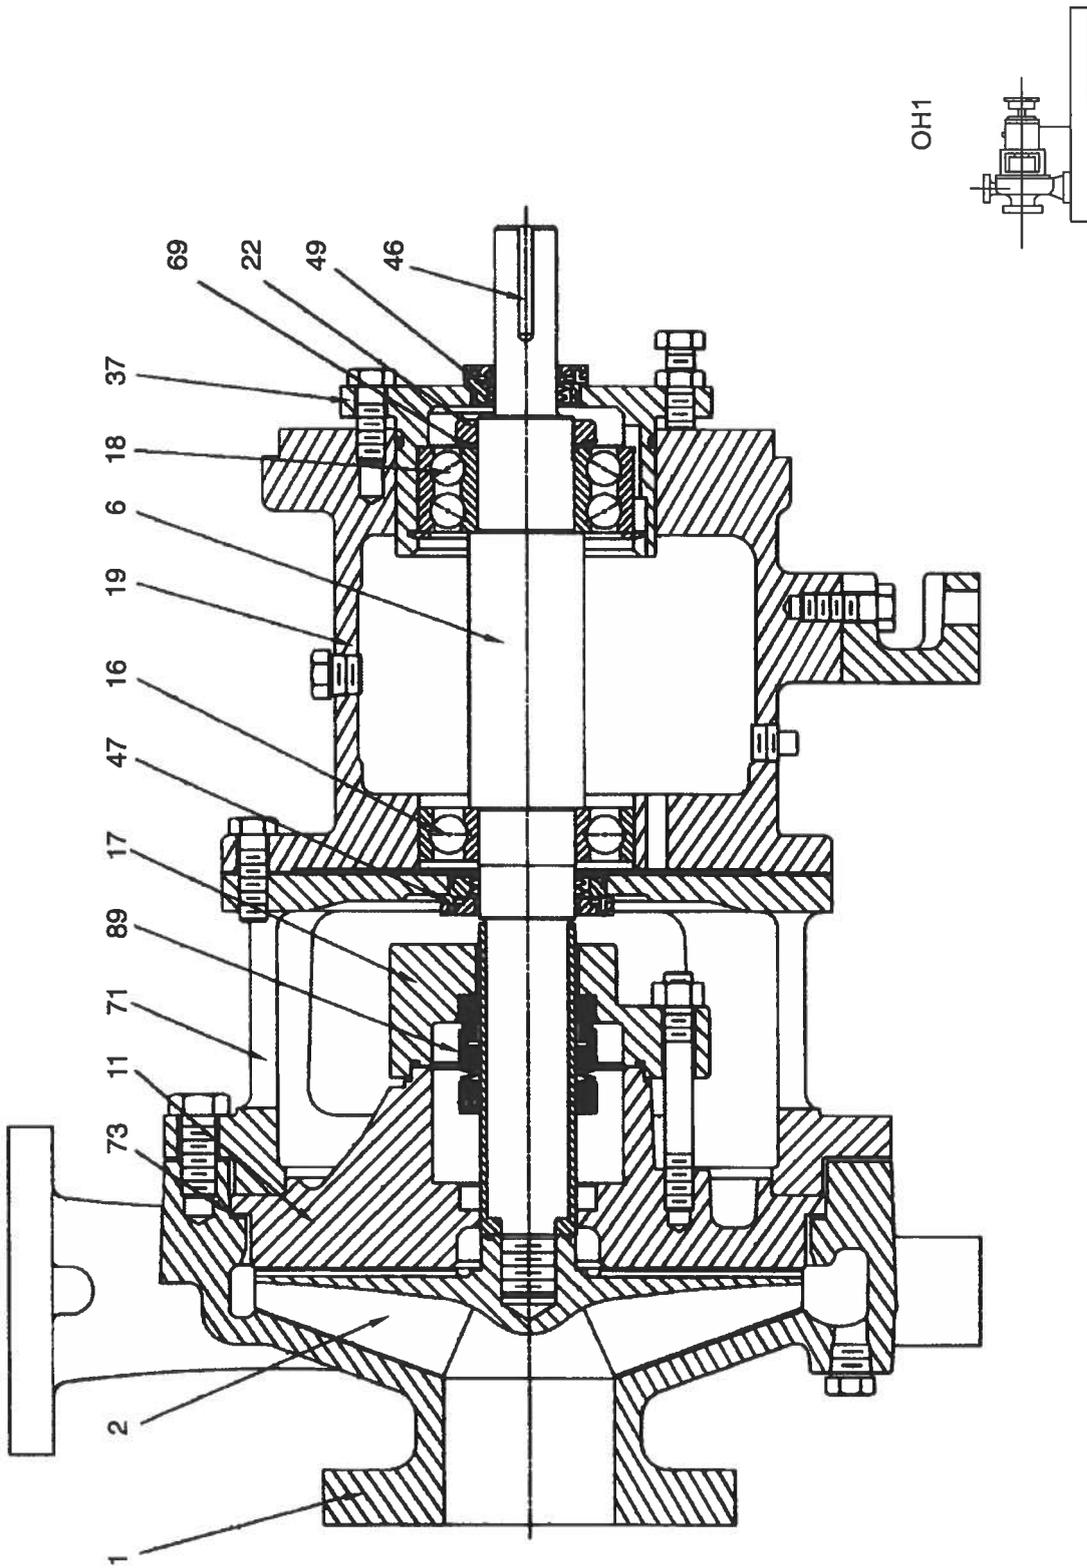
Overhung impeller — flexibly coupled — single stage — foot mounted — ANSI B73.1
